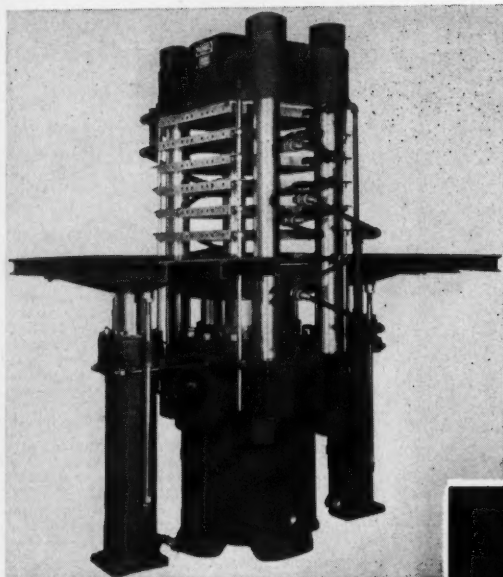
A six-opening rubber molding press with hydraulic lift tables for facilitating loading and unloading molds from the several platens.
